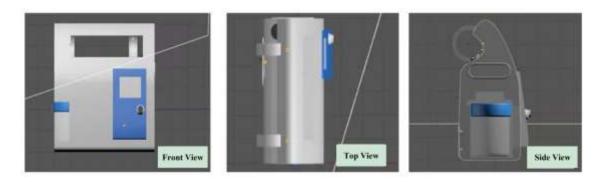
Diagram of the front view, top view and side view of the instrument in CAD design
